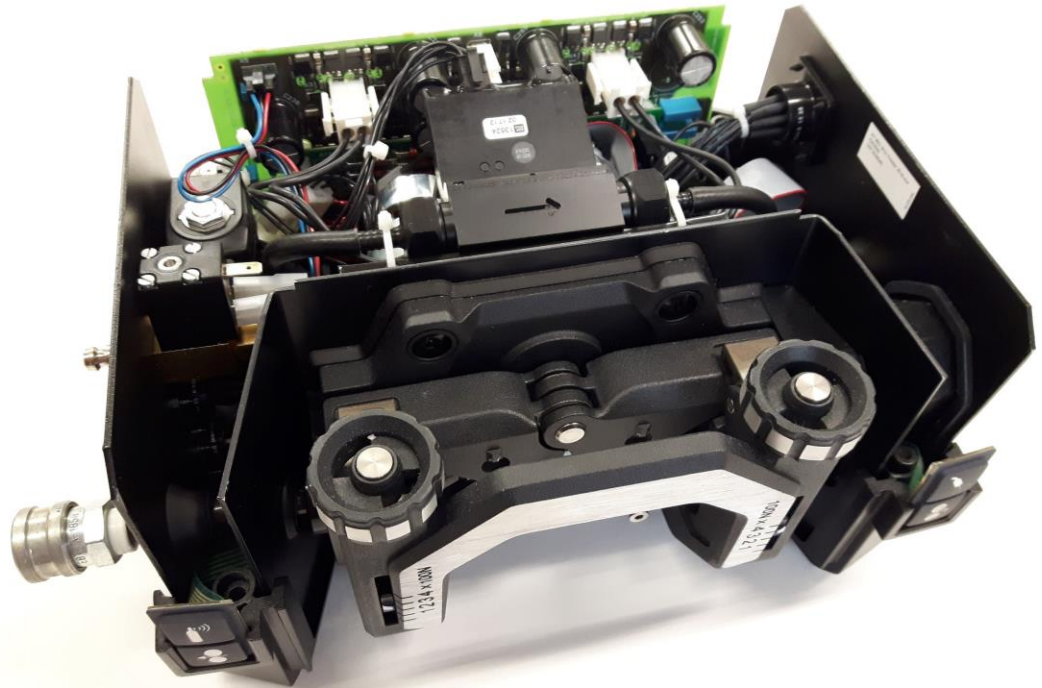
New gas flow meter installed in the wire feeder of the A7 MIG Welder
